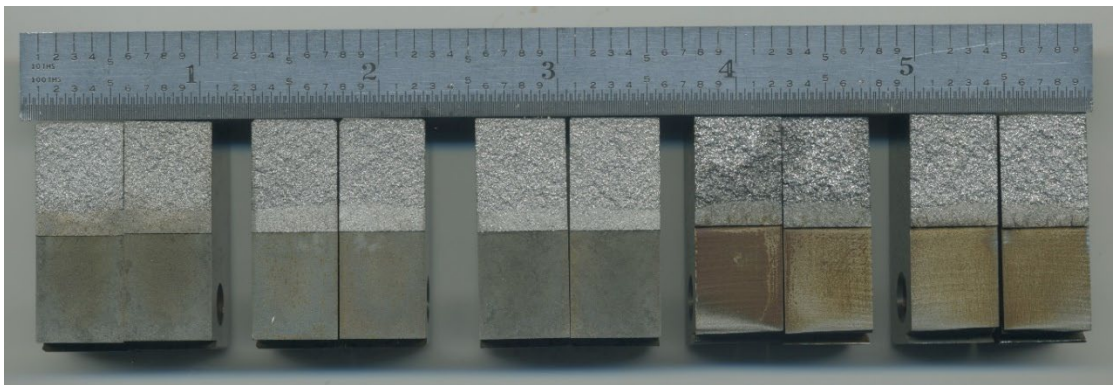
Fracture surfaces after fracture toughness testing, from left to right: AHH, HH, SS, CF&I77, and HAY84
